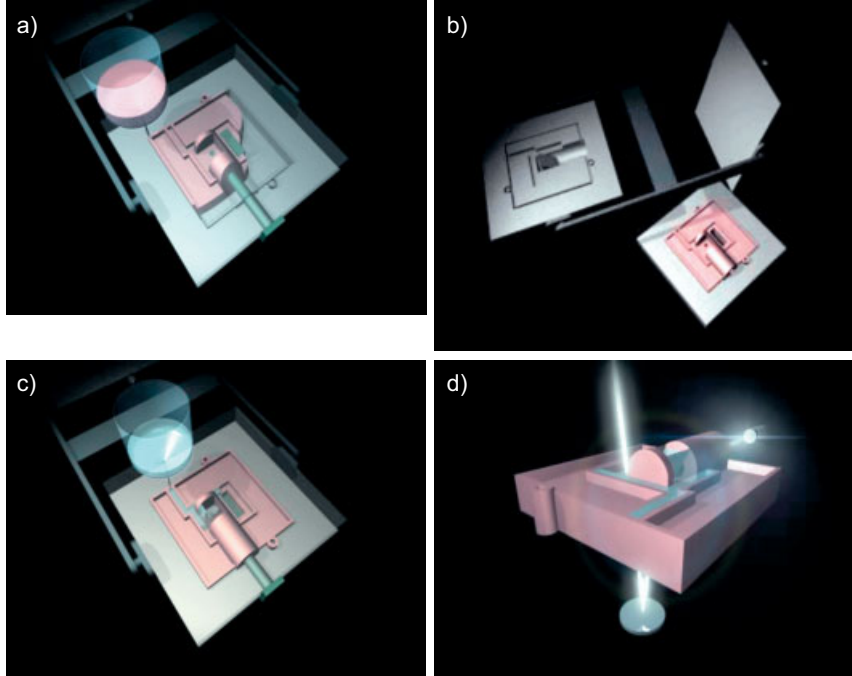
Two-component injection molding. a) Step 1: molding of the frame component; b) step 2: mold rotation; c) step 3: molding of the transparent component; d) optical function.
